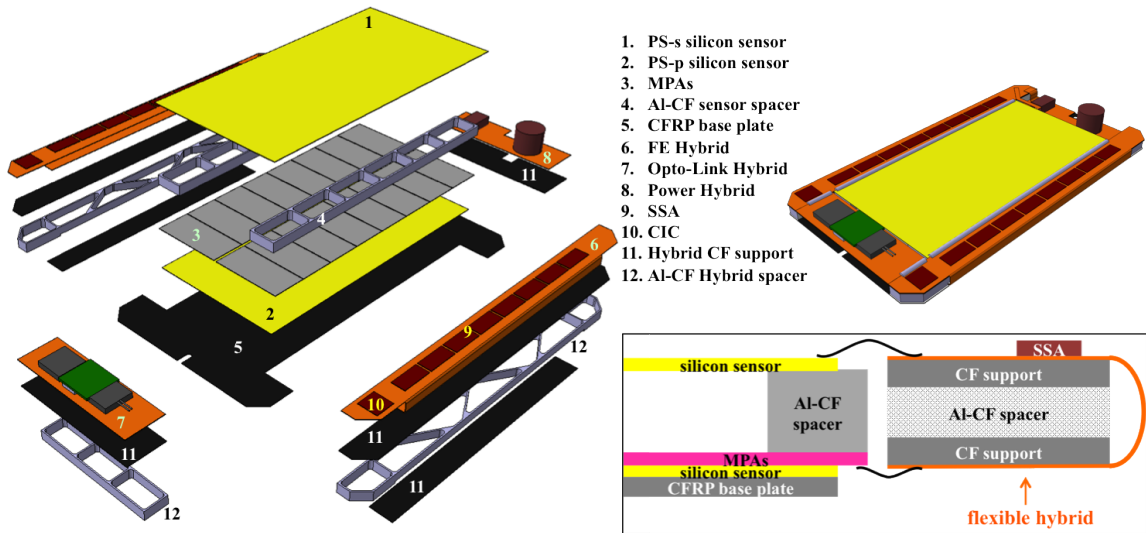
Exploded view of the PS module components (left), 3D view of the assembled module (upper right), and a sketch of the FE Hybrid folded around its support (lower right). The base plate is glued onto a flat surface on the support structure that is kept cold during operation.
